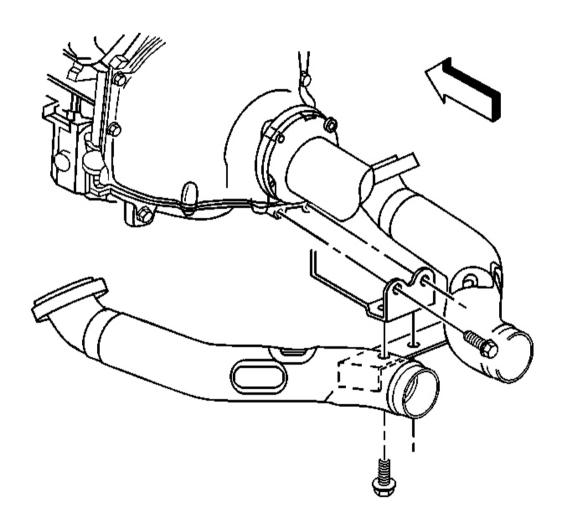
Exhaust Pipe Brace Lower & Bolts Courtesy of GENERAL MOTORS CORP.
